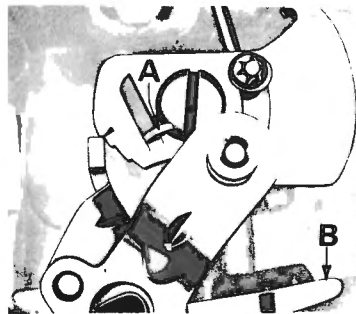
Step cam stop (A) and choke plate arm (B) - FoMoCo
